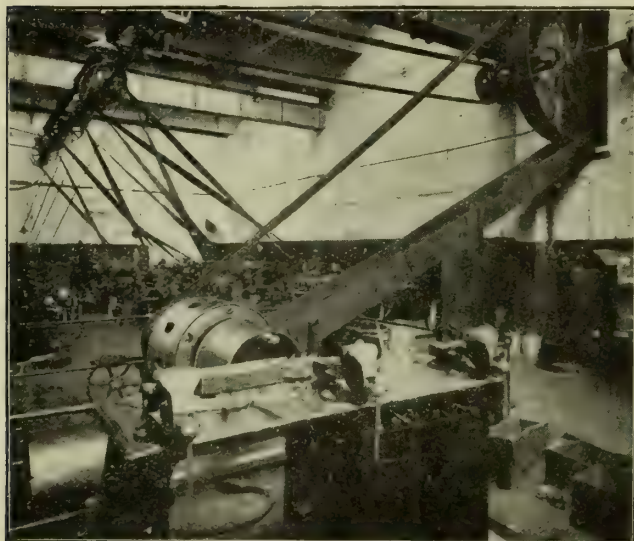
100-H.P. G.E.C. "WITTON" MOTOR DRIVING AUTOMATIC MACHINE SHOP.
